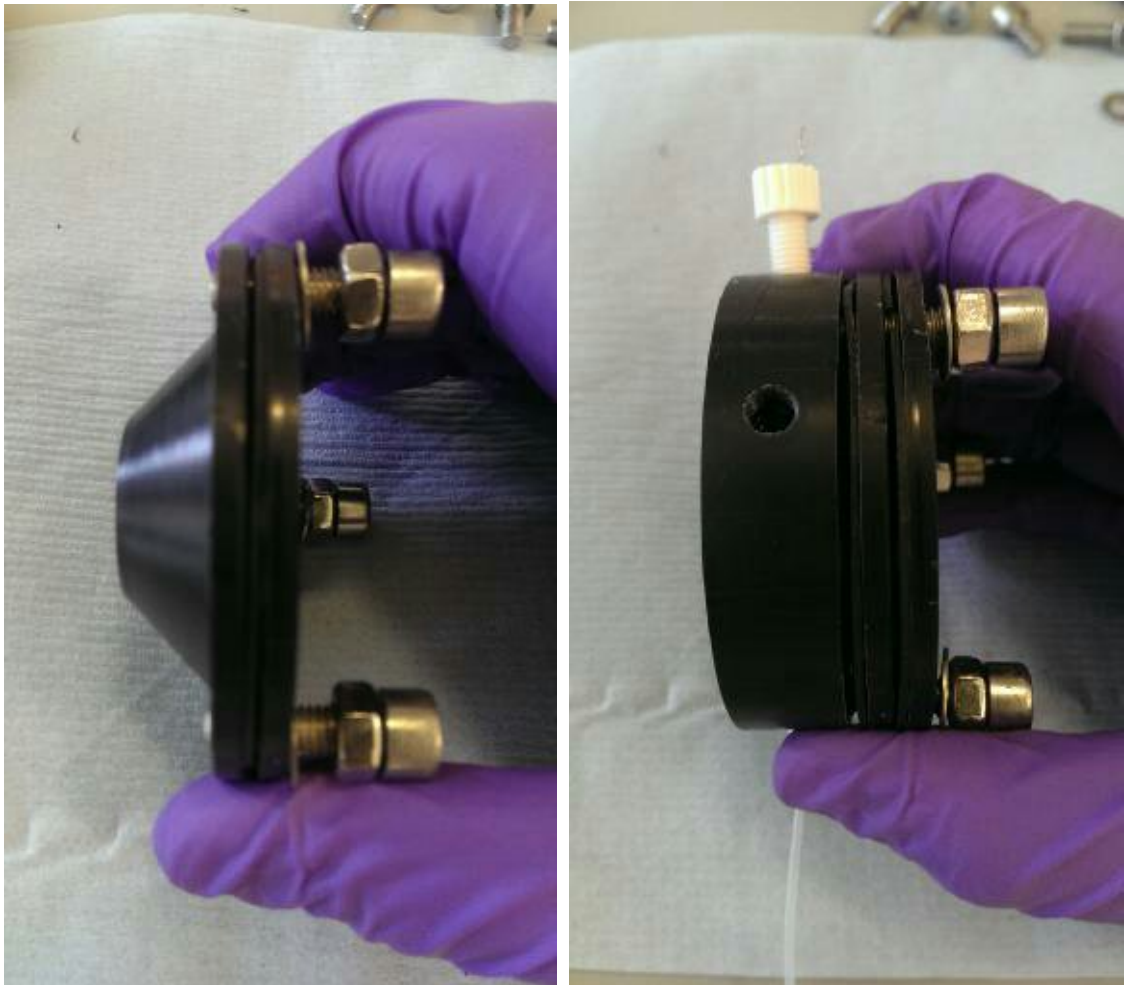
(Left) rear A4 and middle A3 conical parts screwed together with kapton foil J and gasket M inside (not shown) (Right) insertion of rear window A3 / A4 assembly into main body of cell A2.
